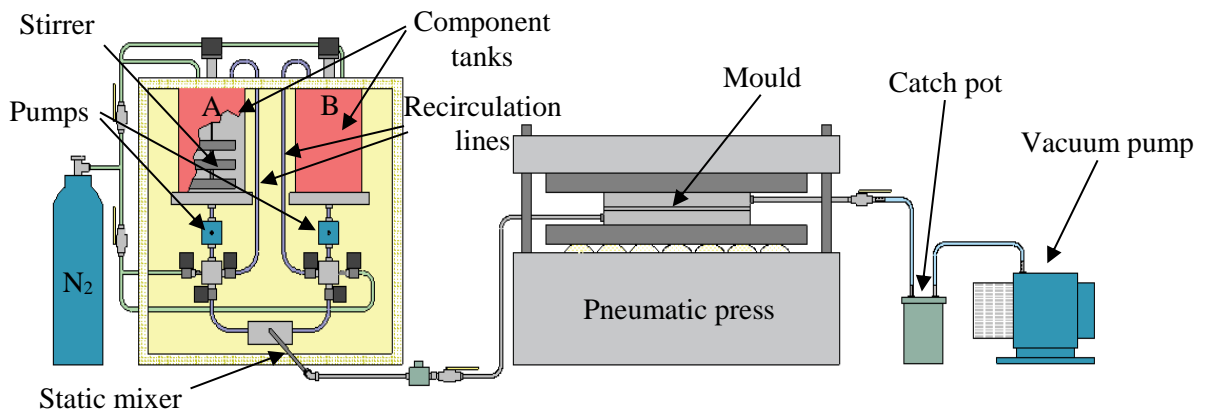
TP-RTM setup consisting of a TP-RTM machine, pneumatic press, closed mould, vacuum pump and catch pot.
